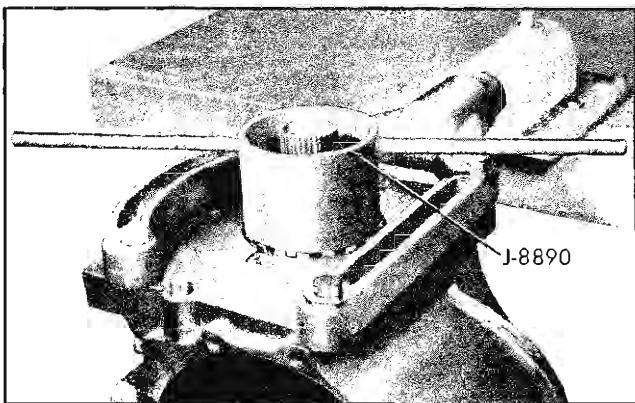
Tool Positioned to Remove Front Pinion Bearing Adjusting Nut
